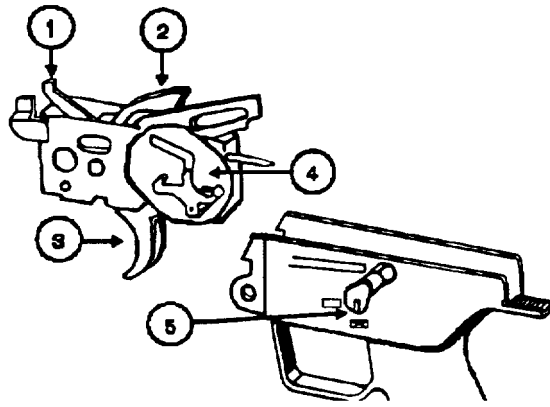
Disassembled Pistol Grip And Trigger Mechanism
